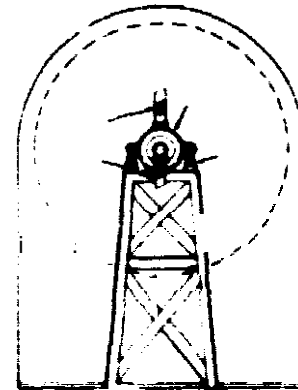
Suggested support arrangement for Type N Joint installed on larger rotary steam tube dryer using Johnson Support Stands, Support Rods and Flexible Metal Hose.
